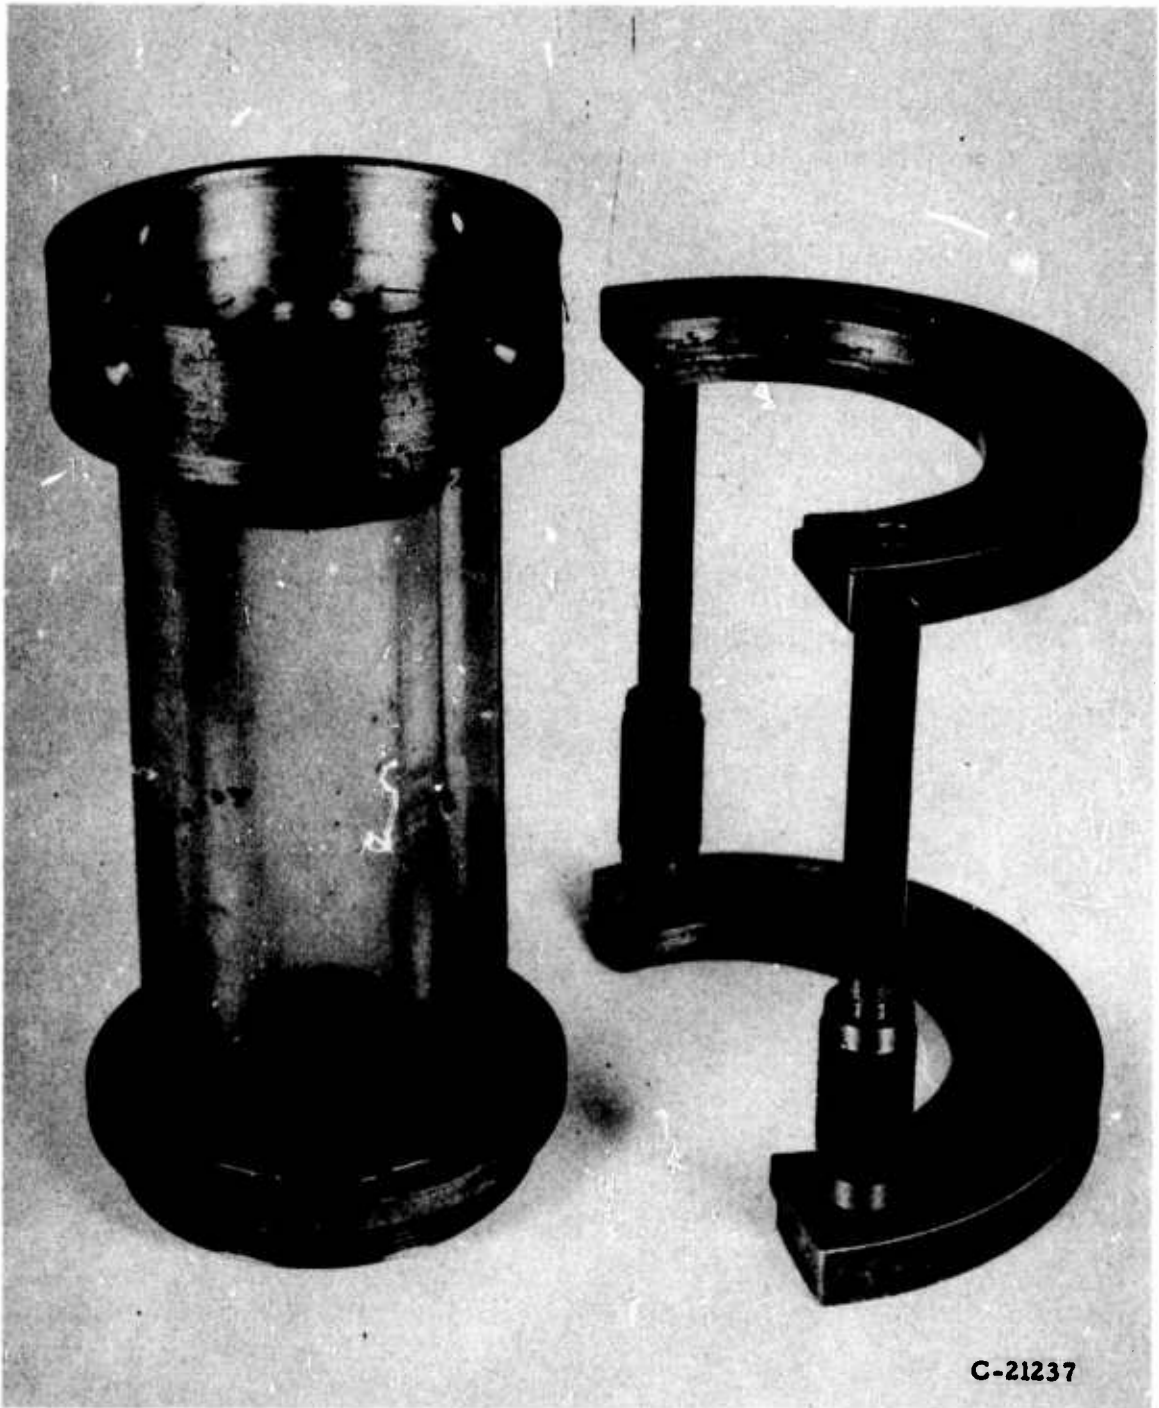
LOAD FIXTURE FOR UNIAXIAL
